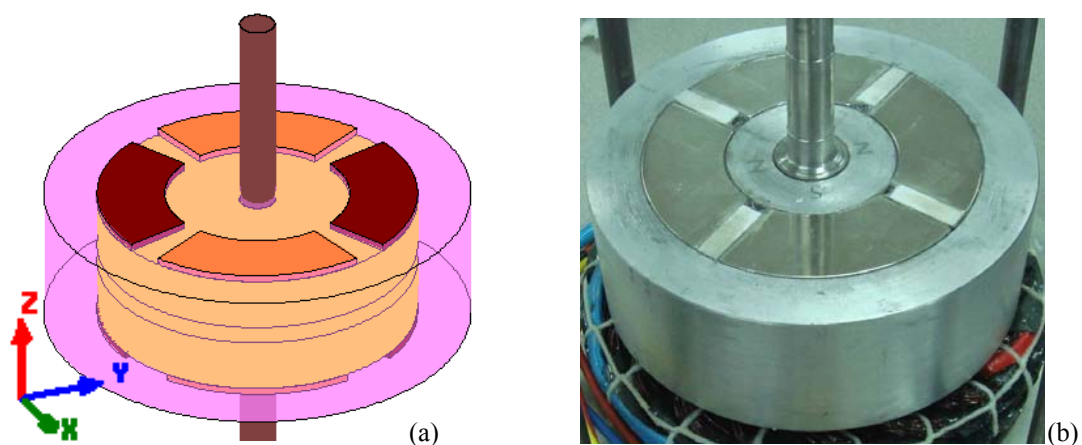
Surface-mounted PM on the rotors, (a) rotor model, (b) rotor prototype
